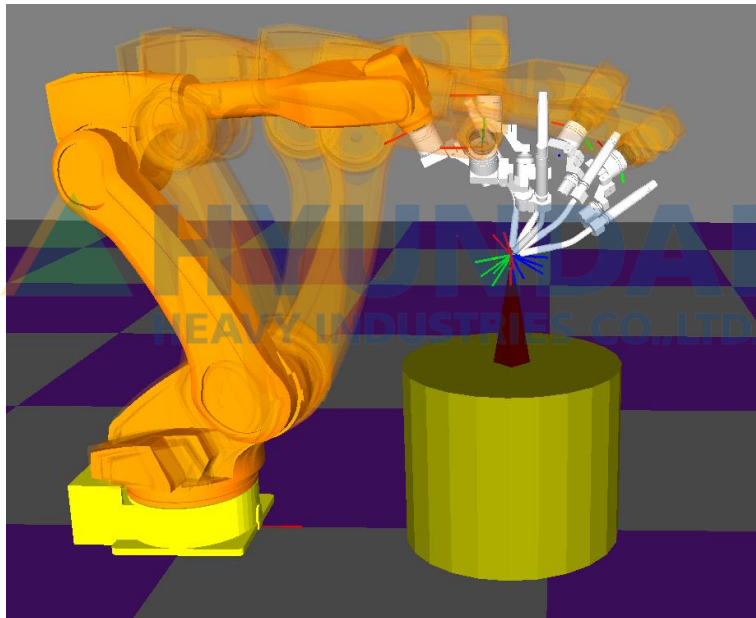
Teaching method for optimizing the axis constant and the tool length
